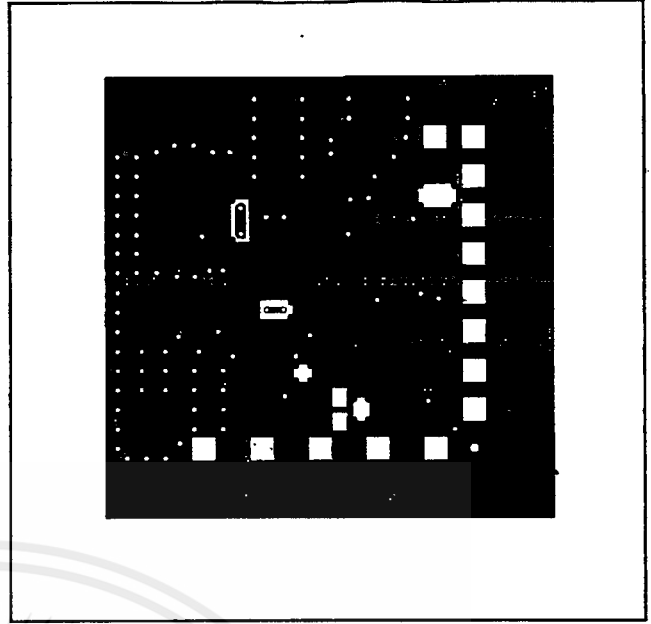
Layout Demonstration Board - lower copper layer (SCALE 1:1)
